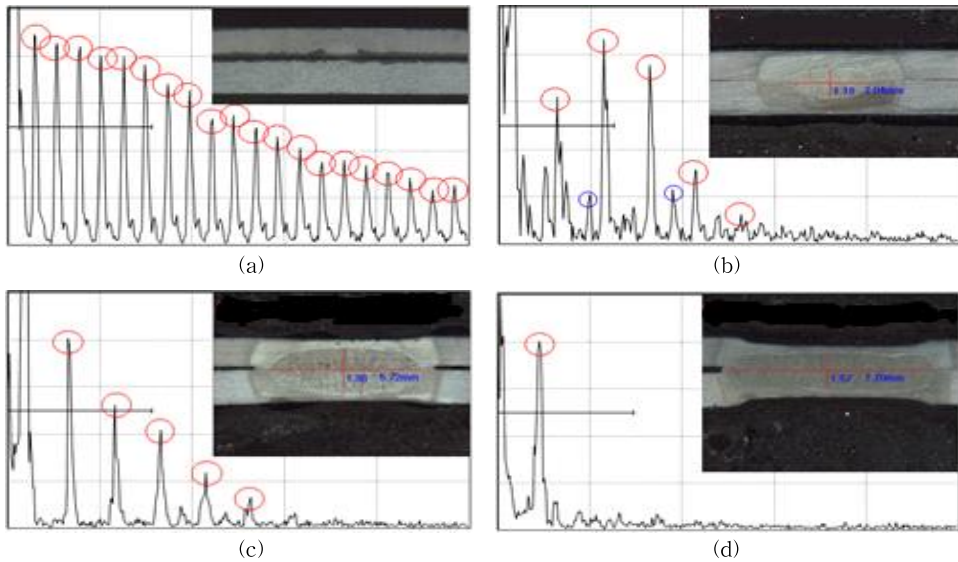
Evaluation for welding quality of the proposed mobile NDT : (a) Loose, (b) Small nugget, (c) Good weld, and (d) Burnt weld.
